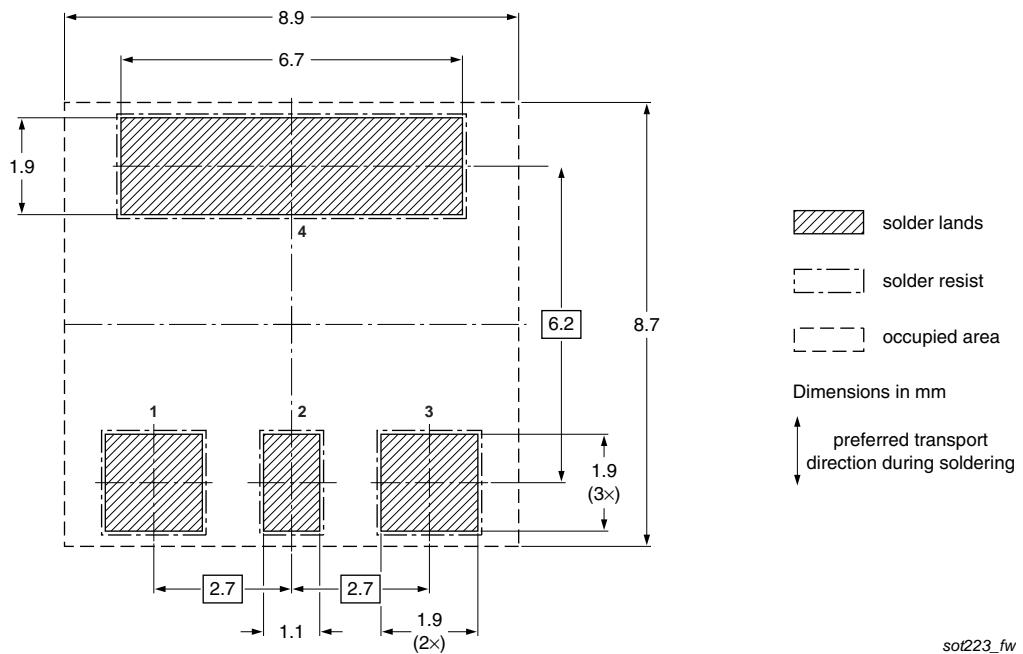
Wave soldering footprint for SOT223 (SC-73)
